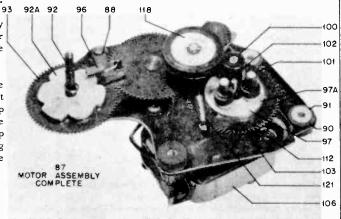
MOTOR & SPEED CHANGING ASSEMBLY
